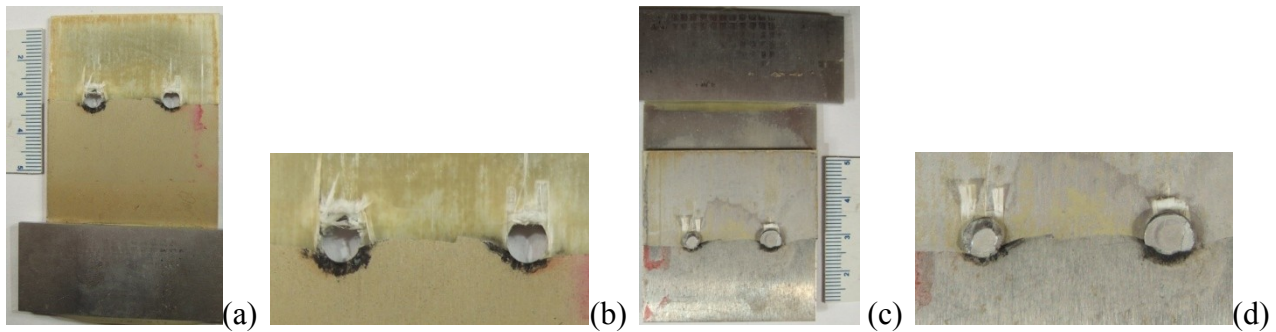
(a) Inner face of countersunk Glare sheet of the GI-Al joint (D); (b) Detailed view; (c) Inner face of straight-bottom hole Al-alloy sheet; (d) Detailed view.
